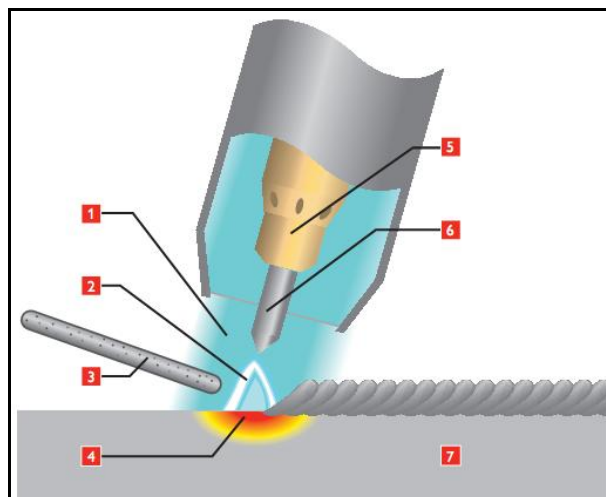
Gas Tungsten Arc Welding (GTAW)
